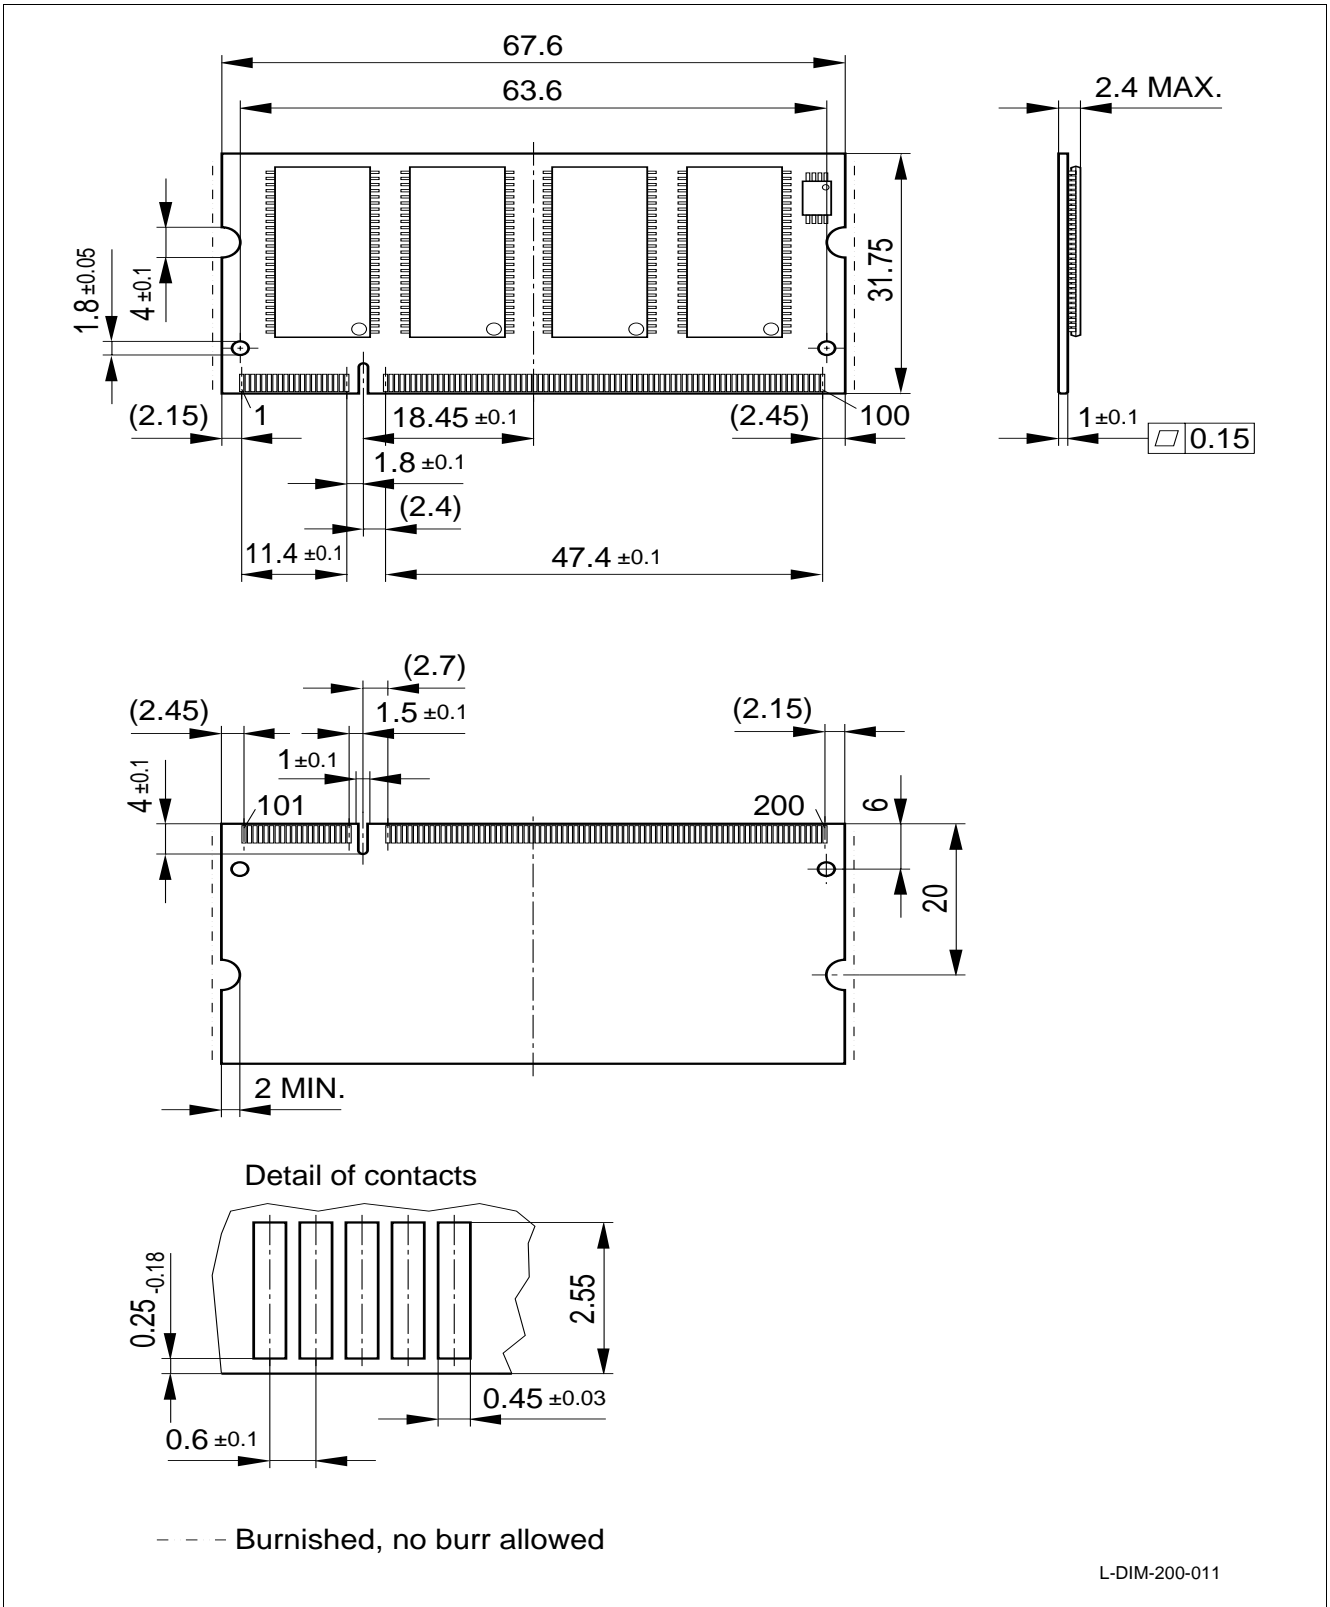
Package Outlines Raw Card C DDR SDRAM SO-DIMM Modules HYS64D1600xGDL-[6/7/8]-B
